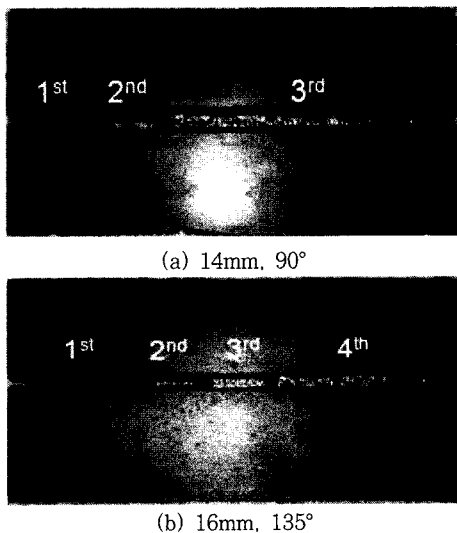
Weld specimens after experiment for measuring the bead geometry
